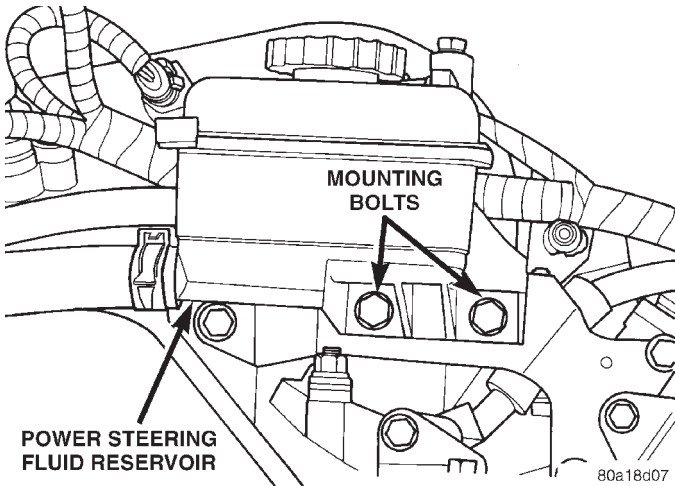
Power Steering Fluid Reservoir Mounting 2.5 Liter Engine
